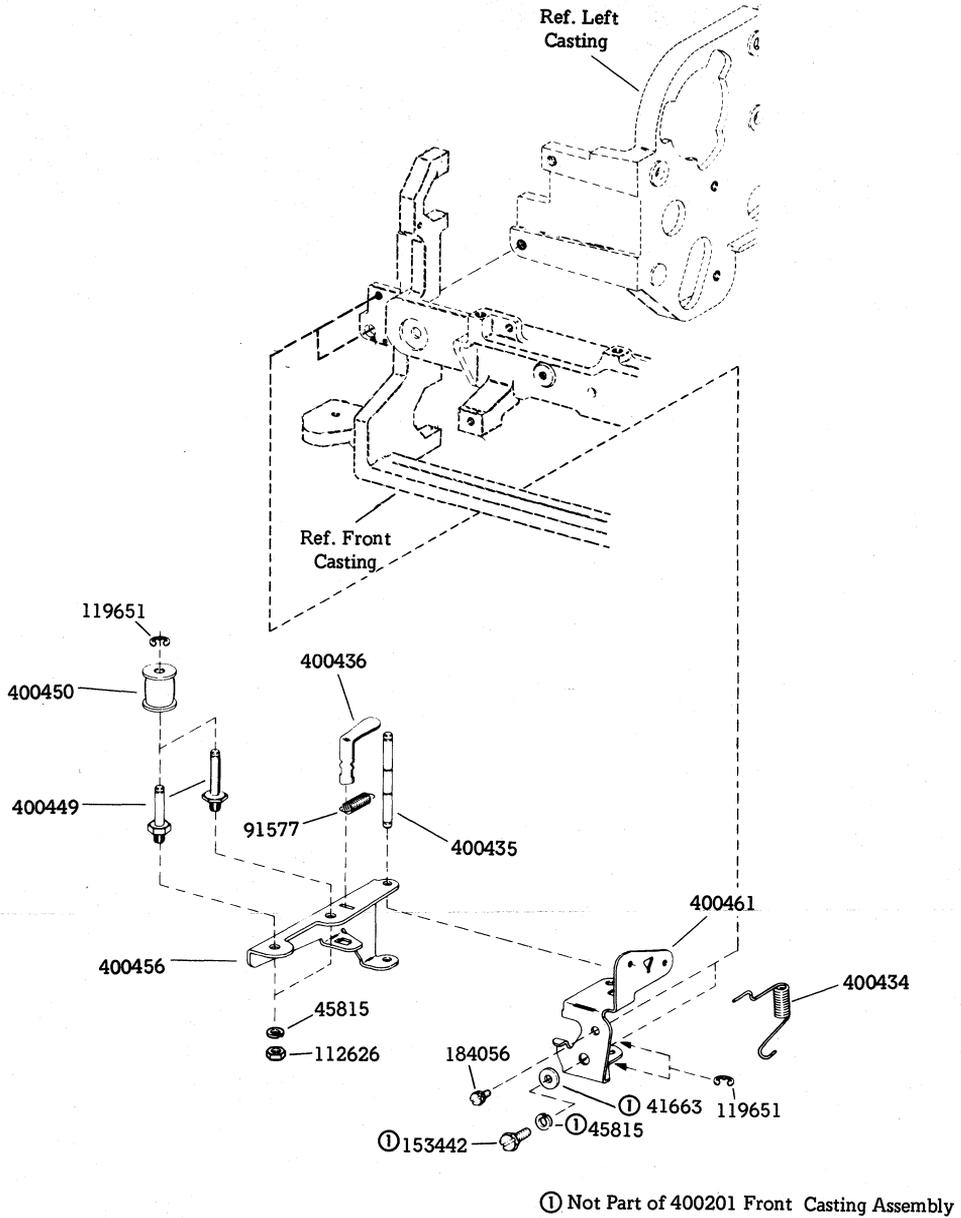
Front Casting Assembly (Friction Feed 40P101 - Early Design) (Cont.)
